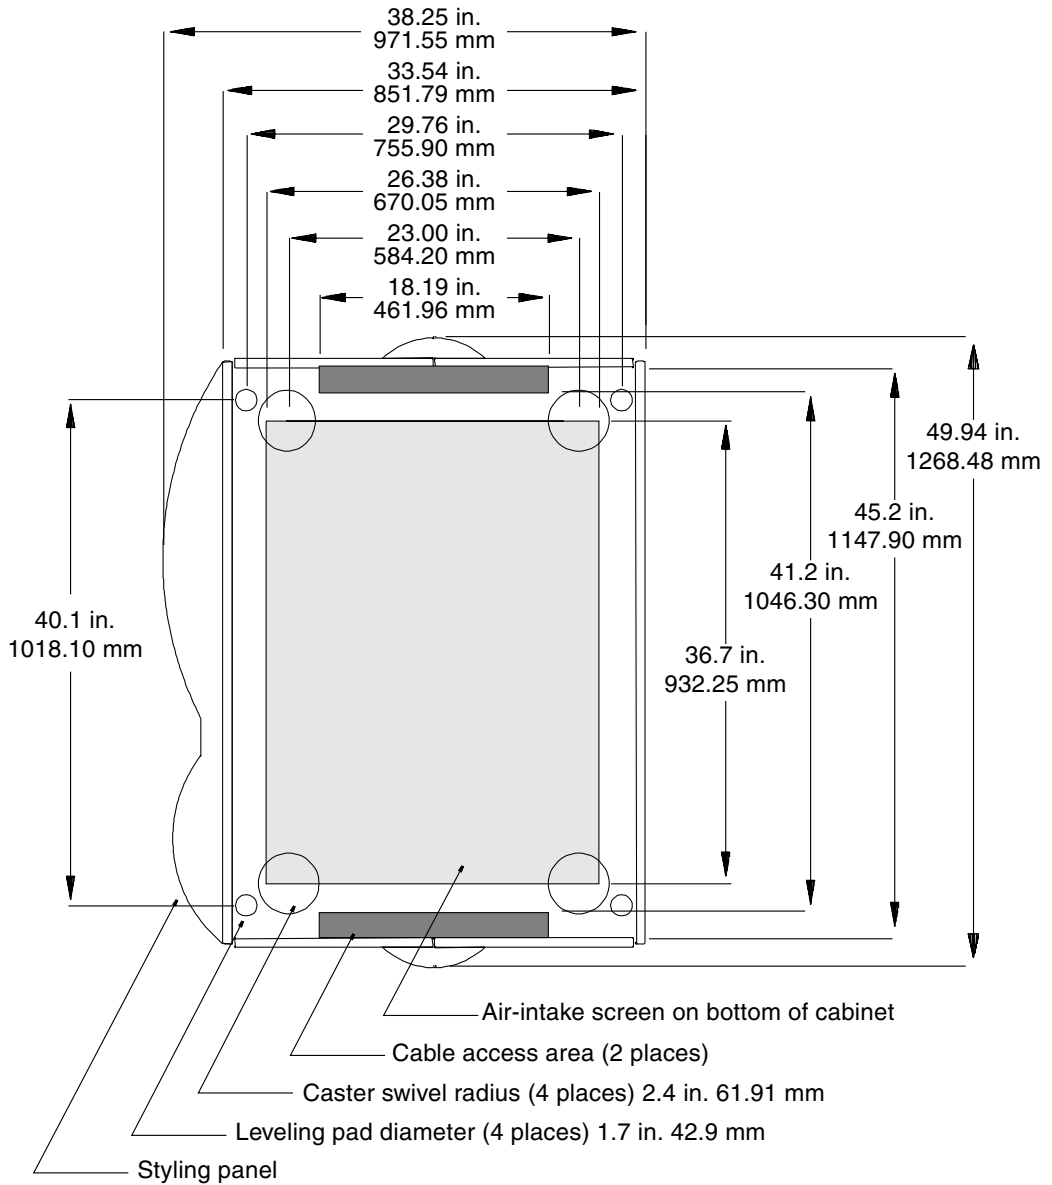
Sun Enterprise 10000 System Floor Cutout Diagram
